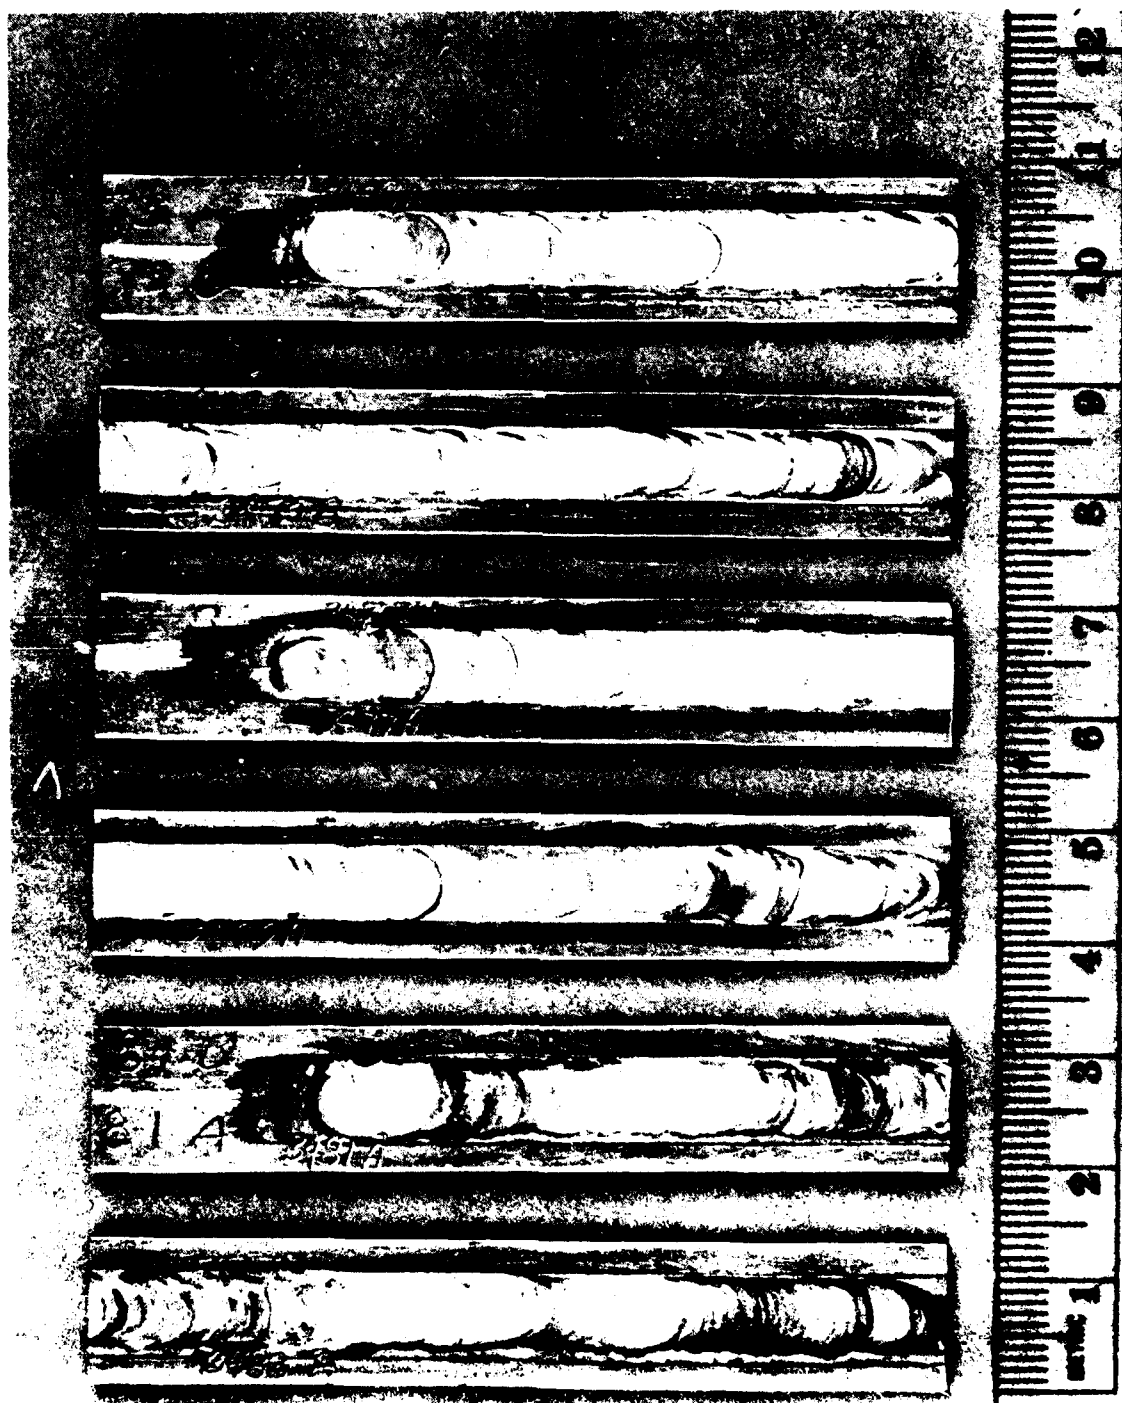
Aluminum Alloy Type 6061 -- Specimens: Pretest
